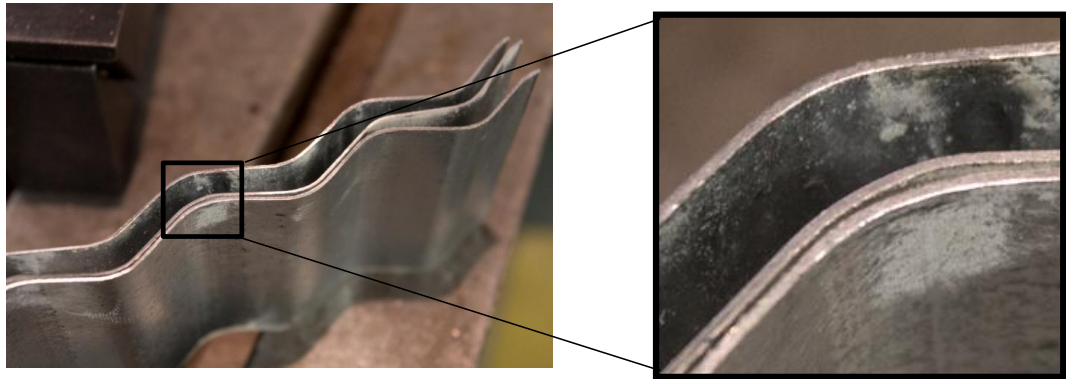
Aluminum form to hold the corrugated sheets.
